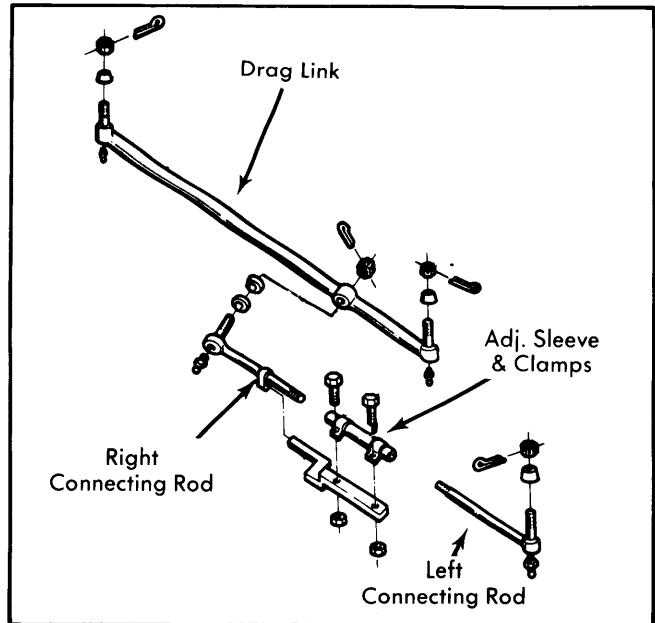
Disassembled View of Steering Linkage (All Models, Exc. F-250 4WD)
